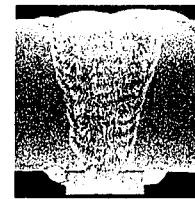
Macrostructure of SAW welded joint of NF616
